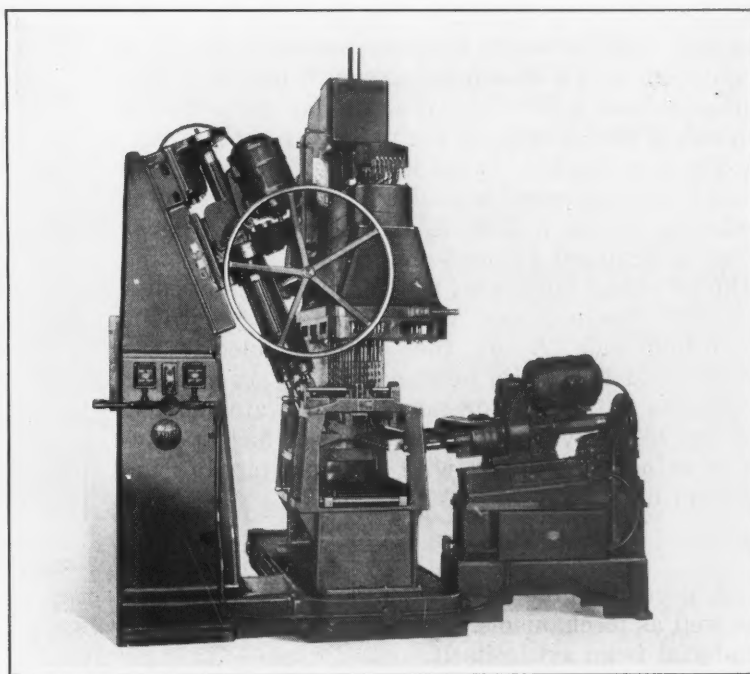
Hand-feed Drilling Machine for Drilling Holes in Top of Cylinder Block and Two Sides, the Holes in the Sides being Drilled at Angles of 22 and 5 Degrees
